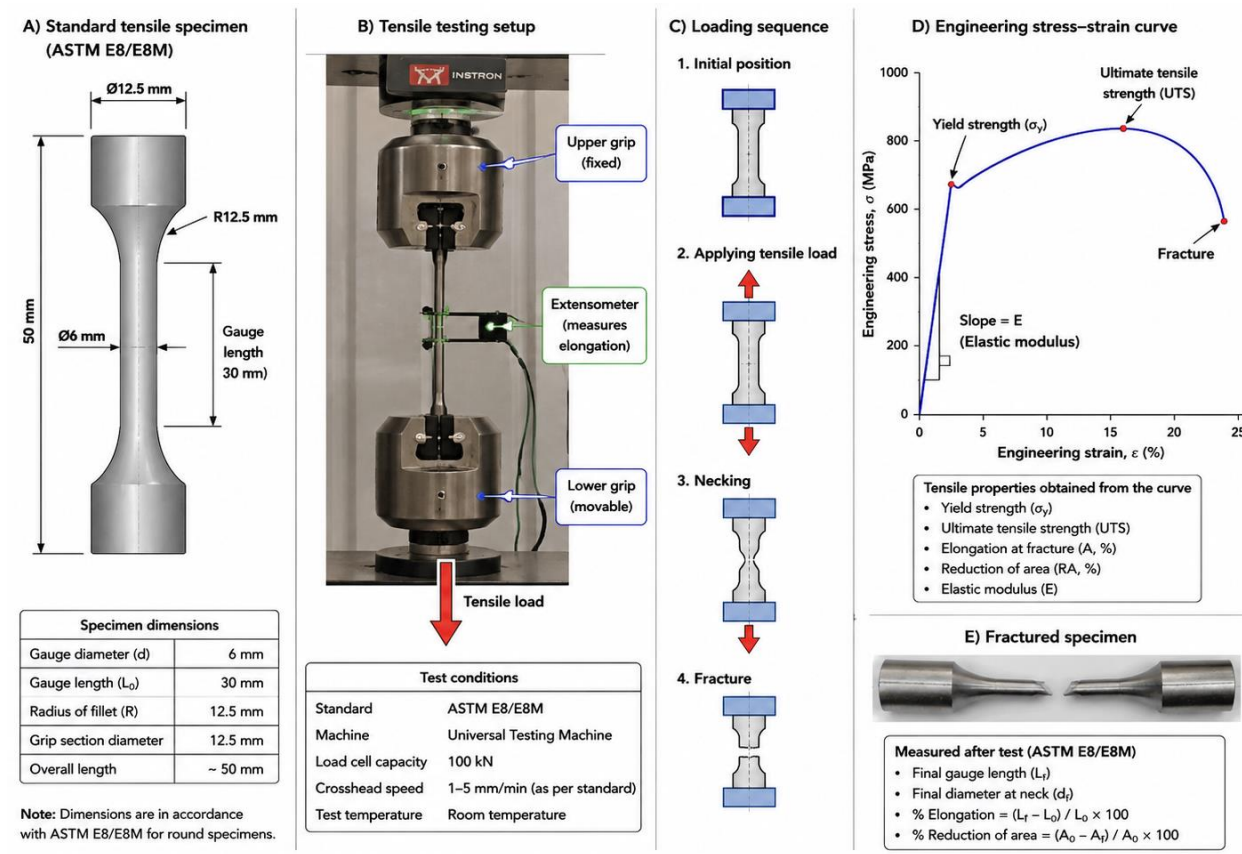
Schematic illustration of the ASTM E8/E8M tensile testing setup showing the standard dog-bone specimen geometry, gripping arrangement in the universal testing machine, extensometer attachment at the gauge section, application of uniaxial tensile loading, and the corresponding engineering stress–strain curve used to determine yield strength, ultimate tensile strength, elongation, and elastic modulus of CK45 carbon steel specimens.
